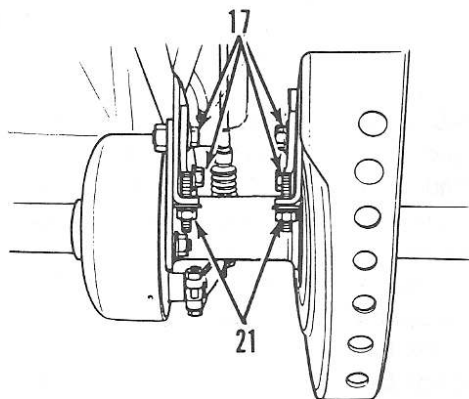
To adjust final drive chain, loosen bearing housing retaining cap screws (17) and rotate adjusting nuts (21).
